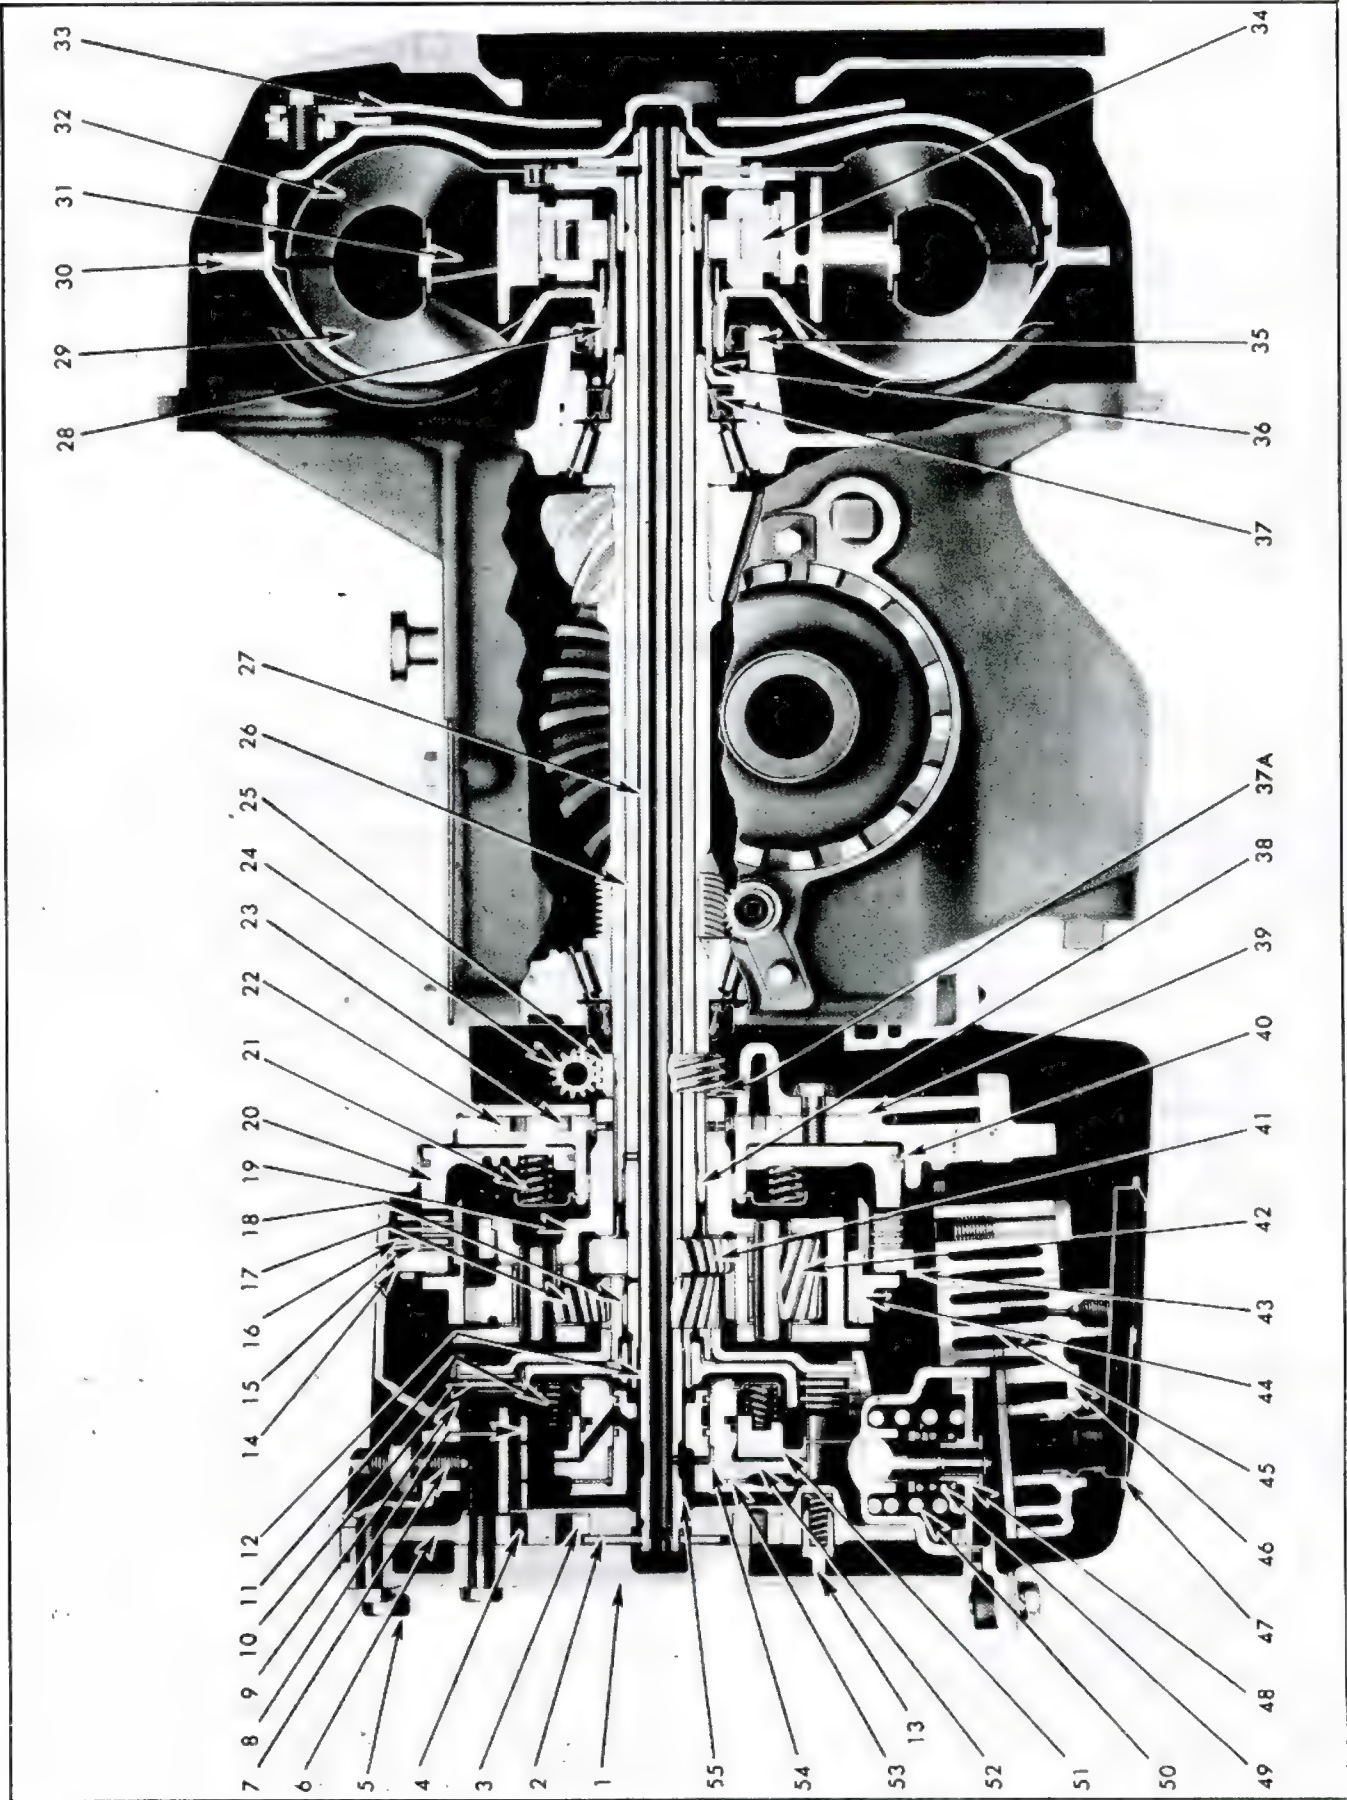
E-1—"Corvair" Powerglide—Cross Sectional View (L.D.F.C. Shown)
